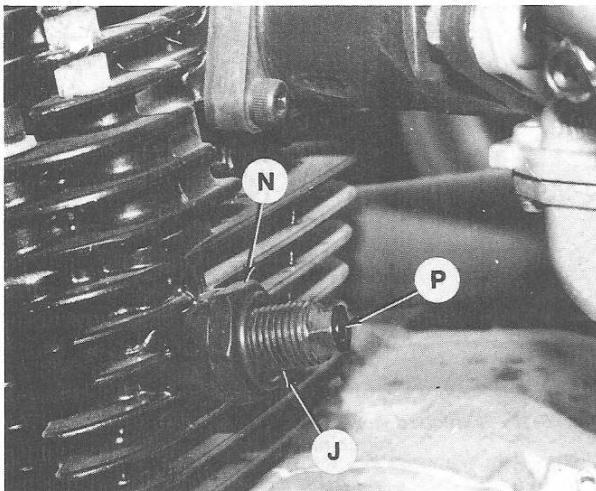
Plunger (P) should move slightly with engine running at idle. Refer to text for camshaft chain tension adjustment.
